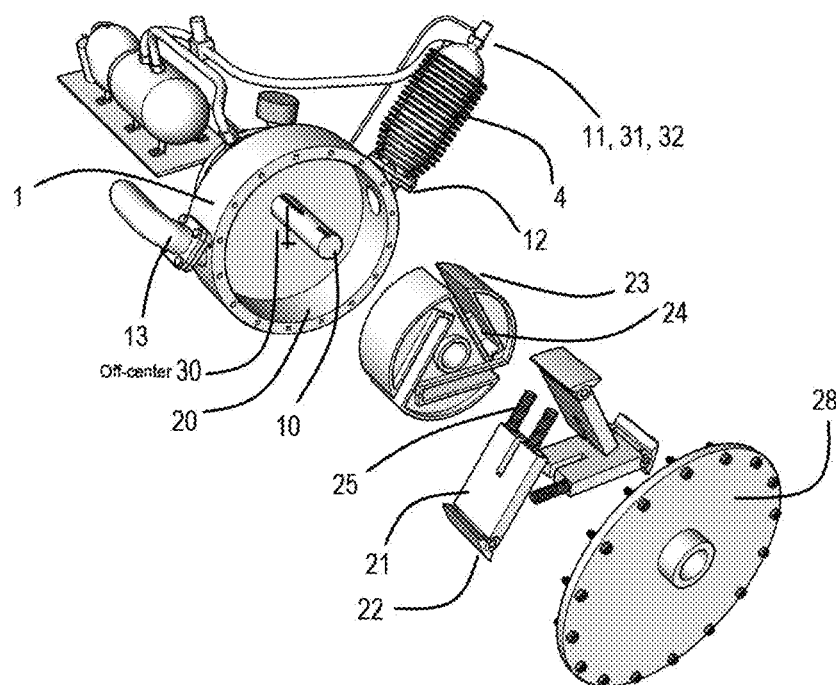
Vane rotary type motor, assembly view of the pneumatic motor with three vanes showing all internal parts.
